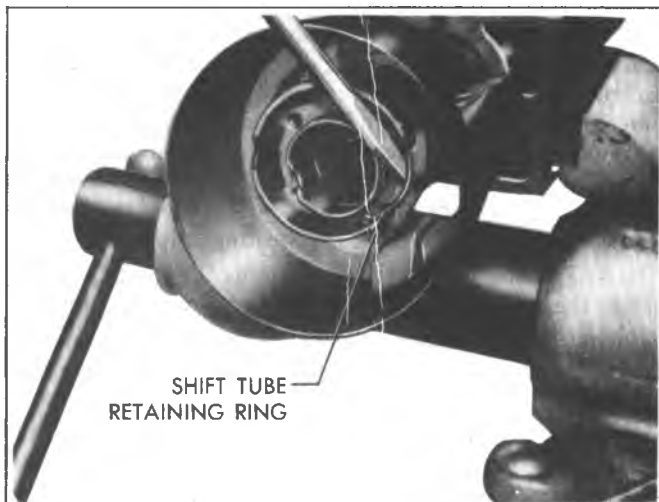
B4-81--Removing Shift Tube Retaining Ring
